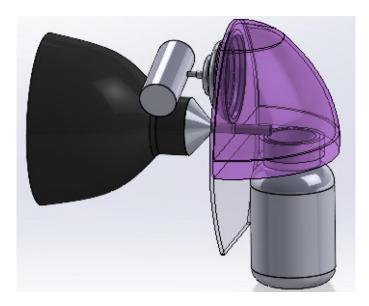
SolidWorks model of large vacuum chamber adapter.
